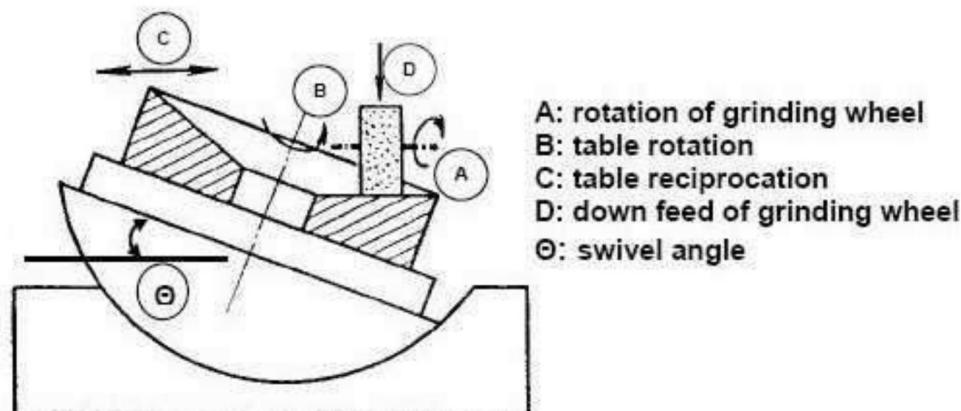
Grinding of a tapered surface in horizontal spindle and rotating table grinding machine
